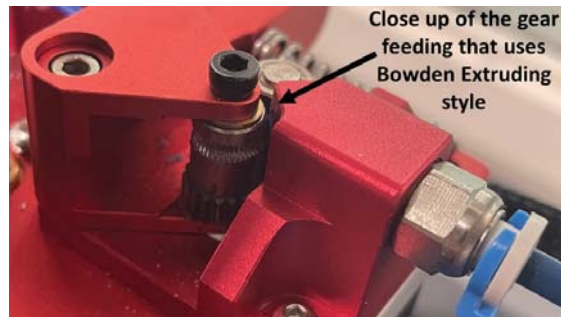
Close-up of the gear feeding that uses the Bowden extruding style.
